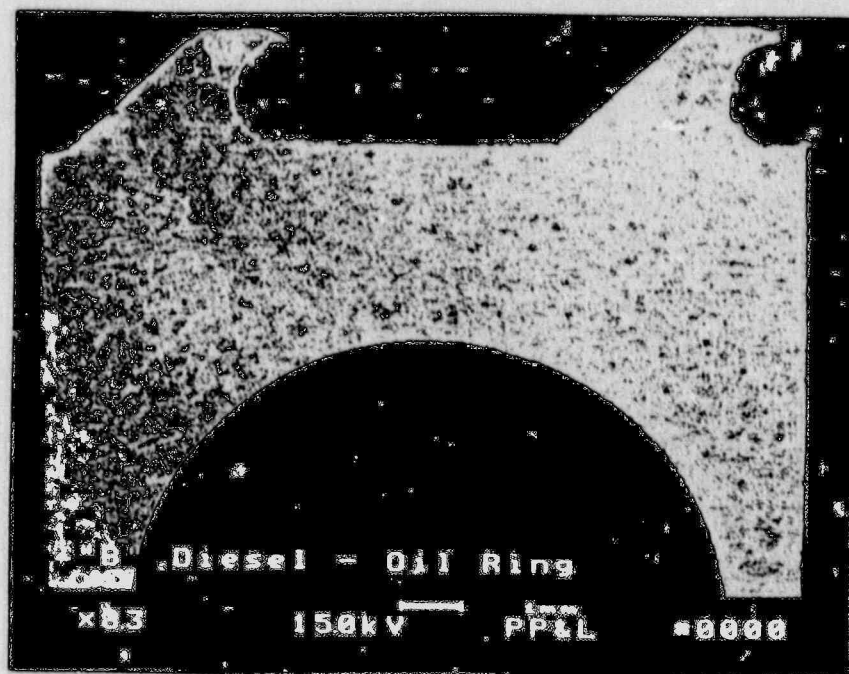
Cross section of the lower oil ring from the B diesel 7L piston showing the wear and deformation on the two wiper surfaces.
